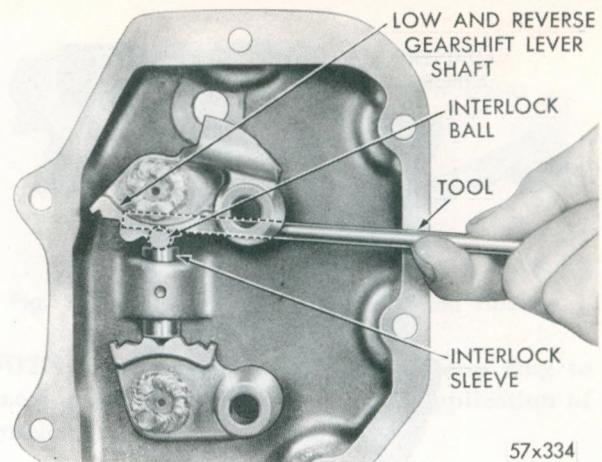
Depressing Interlock Ball—Using Suggested Tool
